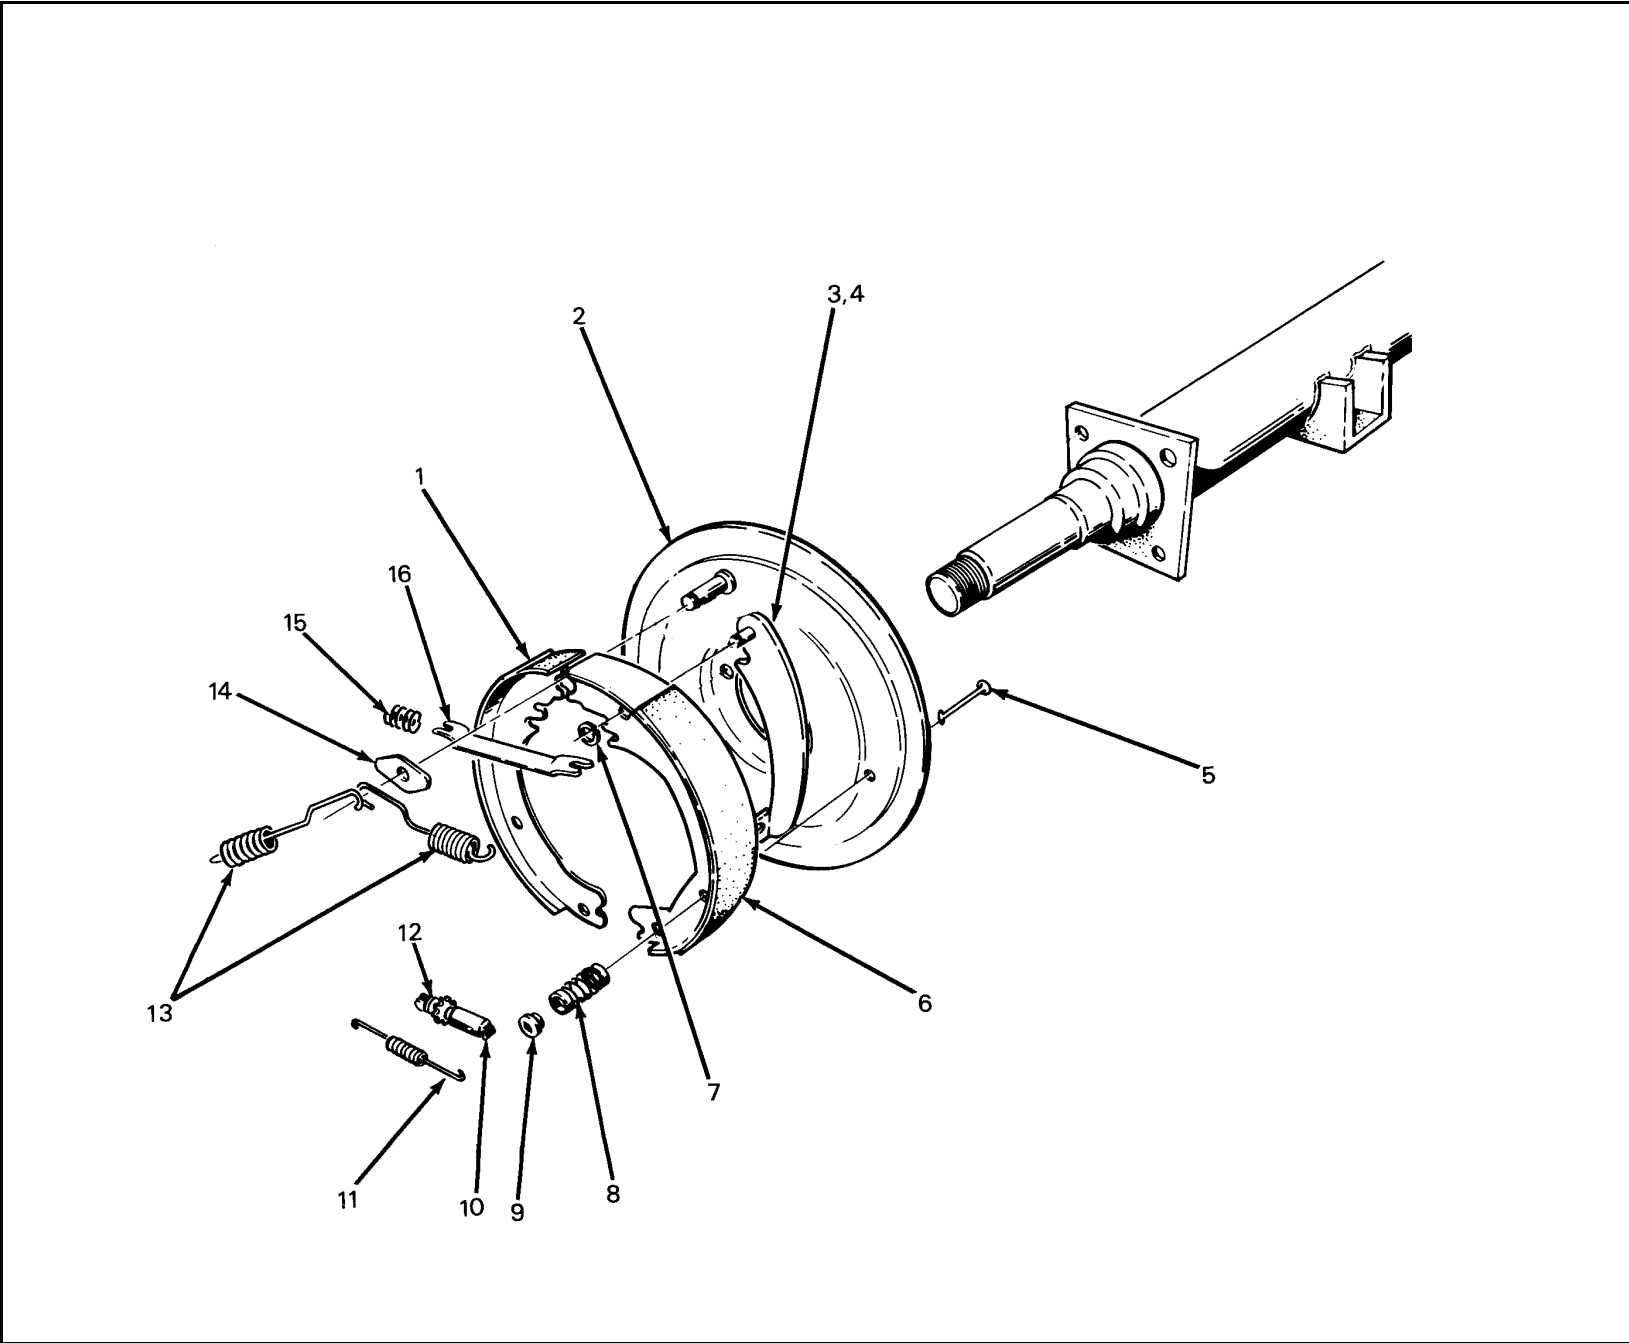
(Sheet 1 of 2) Brake Assembly
